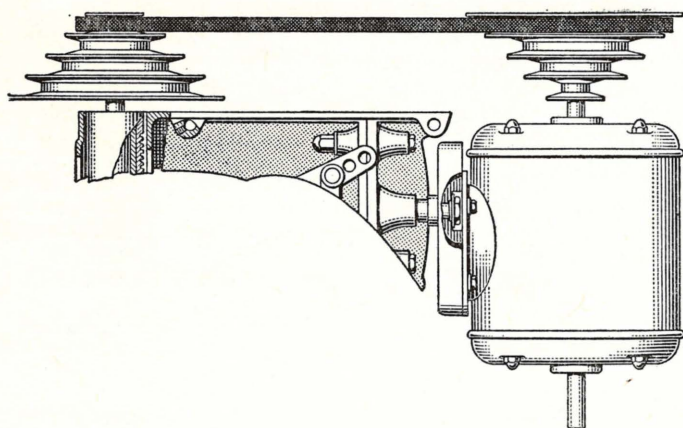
Many home workshop machines have two, three, four, or five step pulleys so that they may be run at different speeds. This belt is put on so that the machine will run faster than the motor
